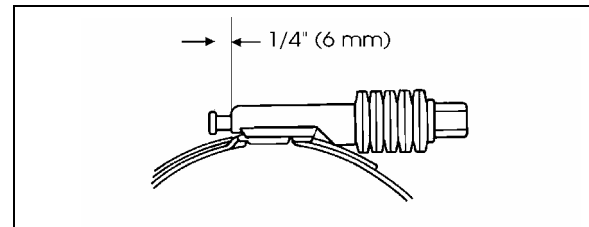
CONSTANT-TORQUE CLAMP 05037
